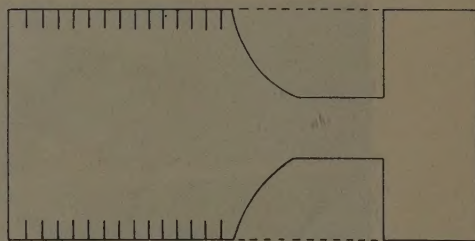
Pattern for making the deflector scoop for attaching to the outlet tube of the duster.
